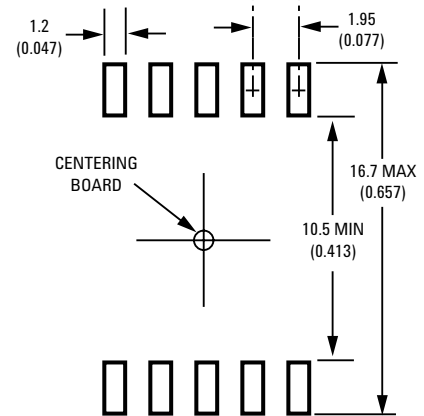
Recommended land pattern for the 0.4" SMT S4 package with a minimum 0.10 mm heel and toe fillet using a 0.10 mm placement tolerance.
